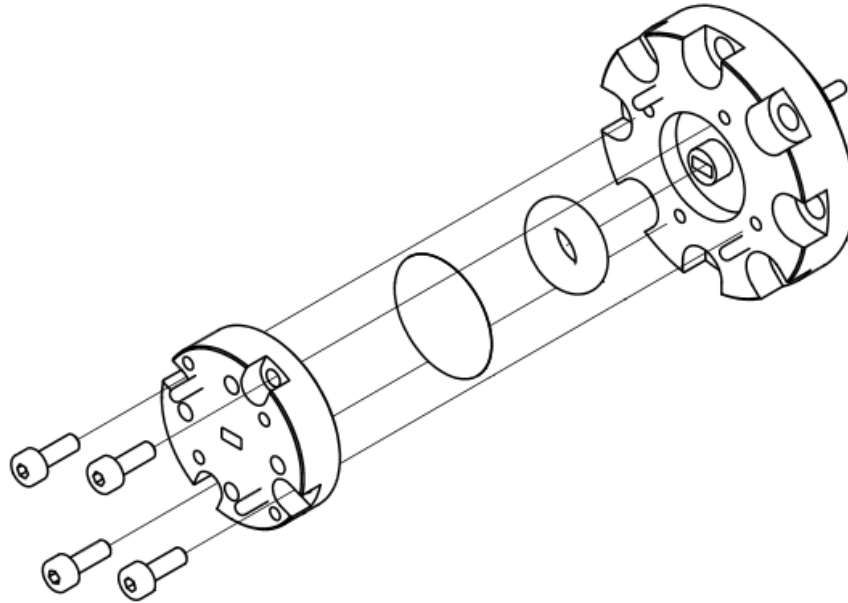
Assembly drawing of the WR-12 RF feedthrough
